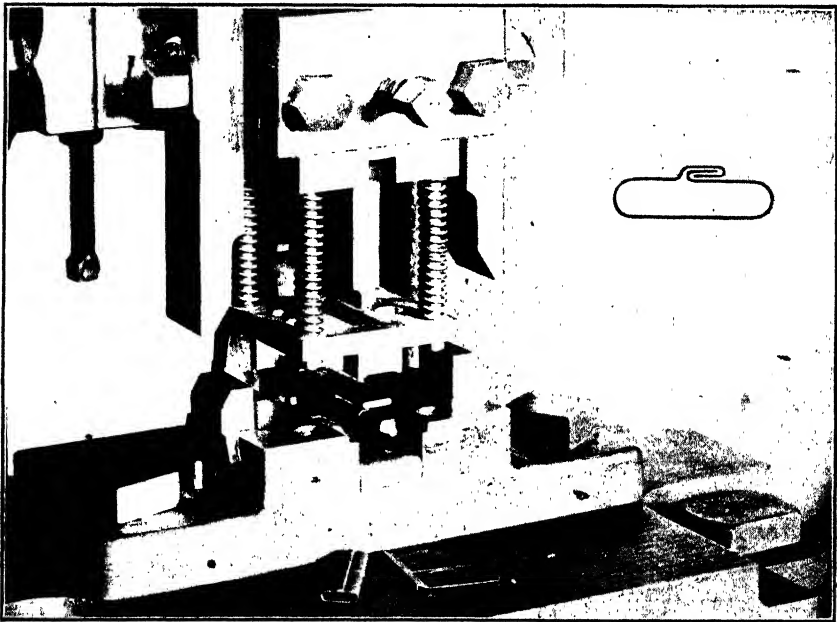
Floating mandrel and wedge motion combined to form and lock a tube.
